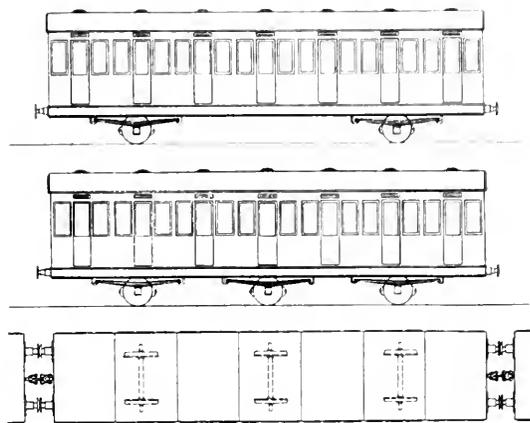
Outline Drawings of the Large Two- and Three-axle Cars Used on European Railways; weight 20 to 23 tons; seating 35 to 72 passengers, depending upon the class; overall wheelbase 28 to 30 ft. The plan shows the arrangement of screw coupler and car buffers
